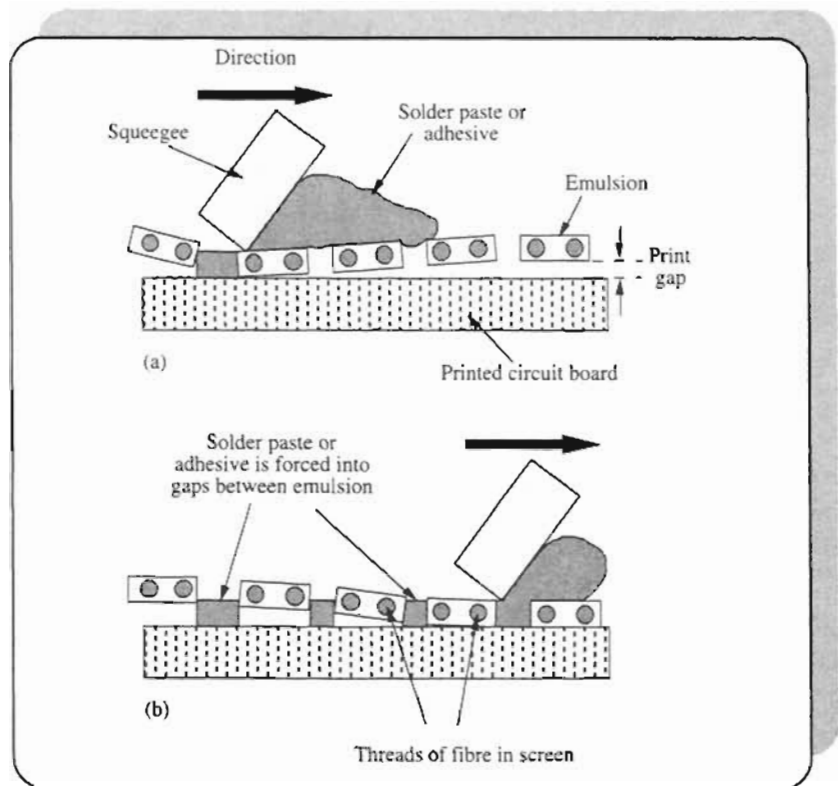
Close-ups of the contact point between squeegee and printed circuit board, as (a) the squeegee starts its stroke and (b) it approaches the stroke end
